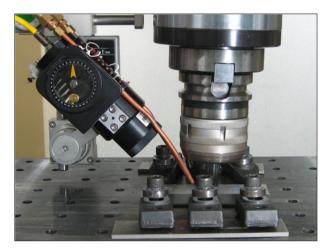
Experimental set-up for laser assisted FSW joint
